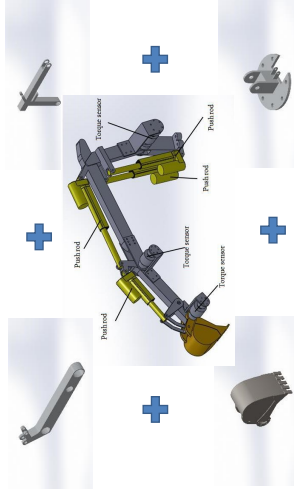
CAD assembly of prototype for parallel actuated mechanism
